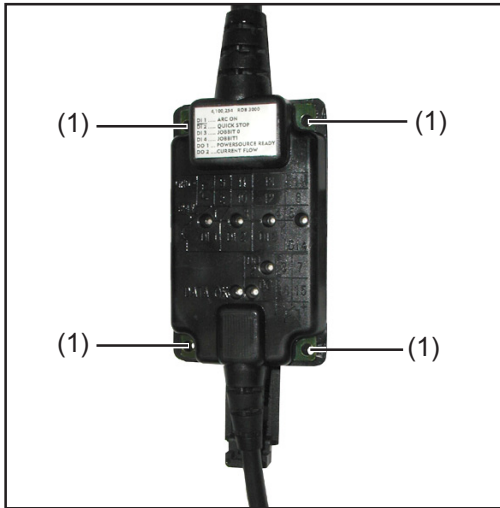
Mounting bores  $\varnothing$  4.2 mm (0.17 in.)
